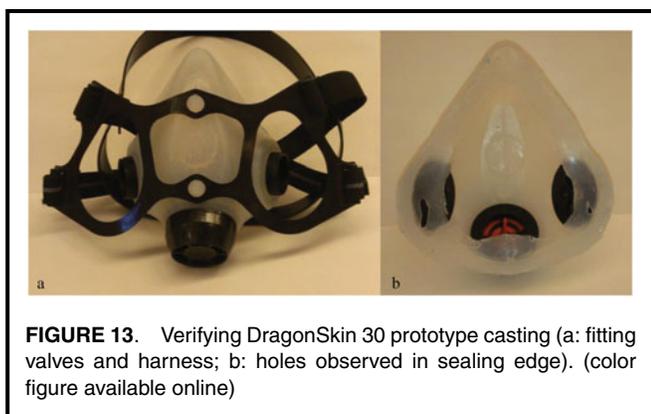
Verifying DragonSkin 30 prototype casting (a: fitting valves and harness; b: holes observed in sealing edge). (color figure available online)
